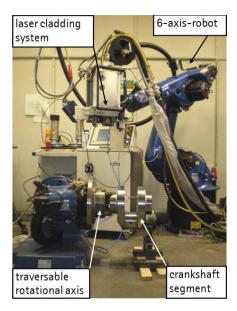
Laser cladding head attached to robot manipulation system, parameters of cladding process
